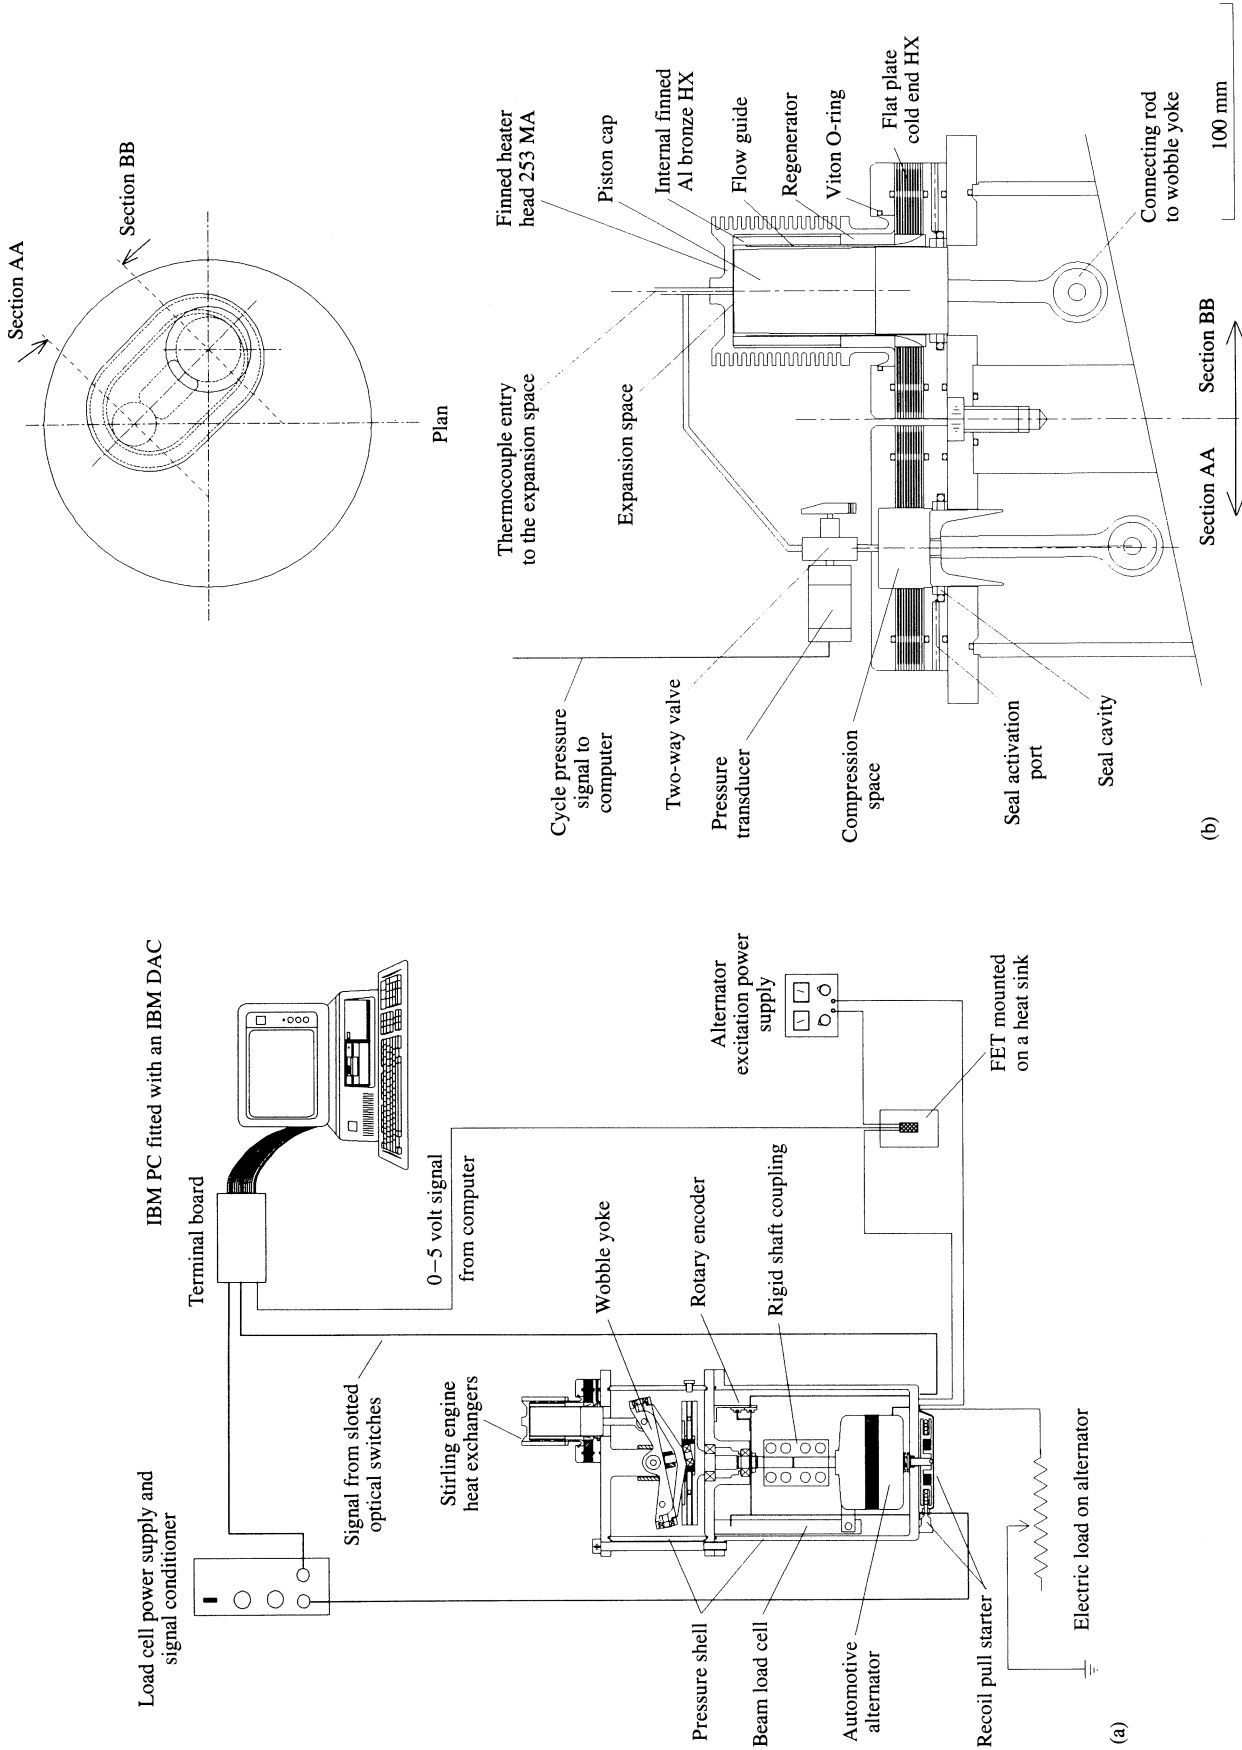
(a) Hermetically sealed dynamometer for DMC 3 and the control equipment used (b) Cross-section of DMC 3 heat exchangers, pistons and seal cavities
